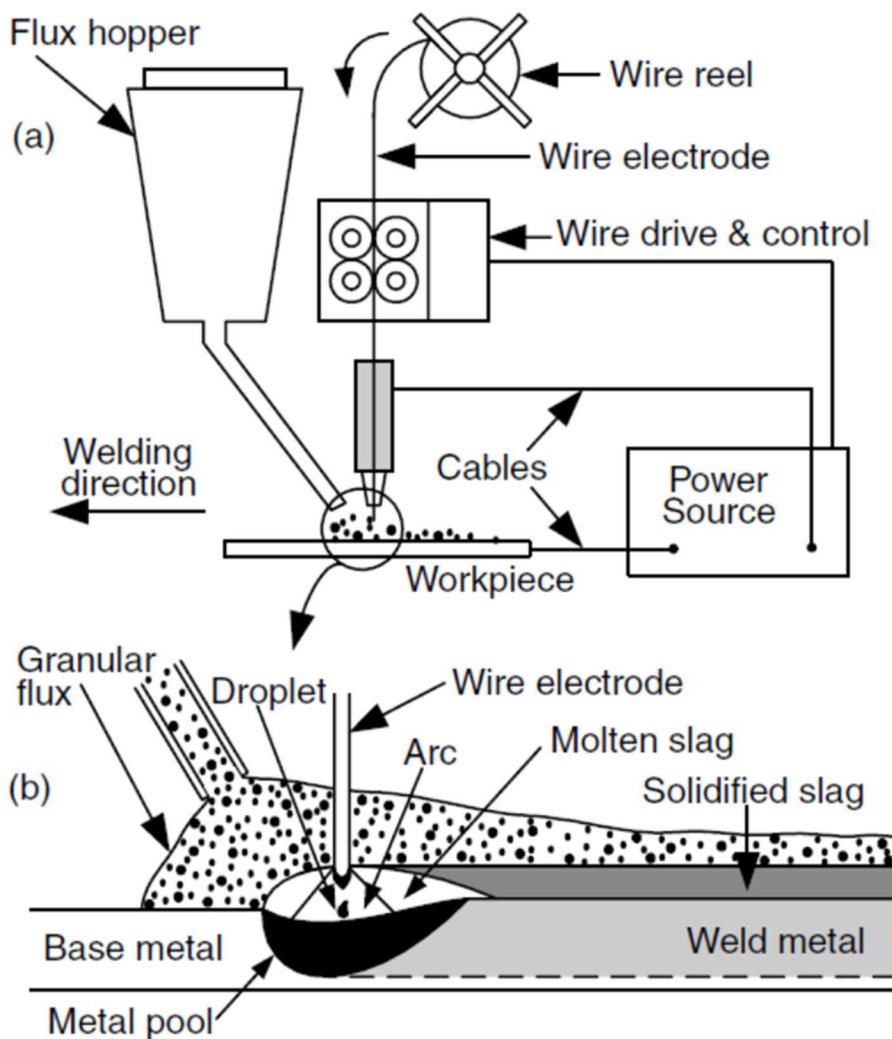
The submerged arc welding process: (a) overall process; (b) welding area enlarged
